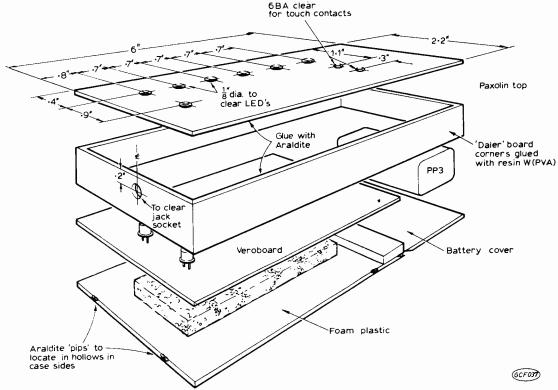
Construction of the case, the sides and bottom being made from Daler board and the panel from paxolin.
